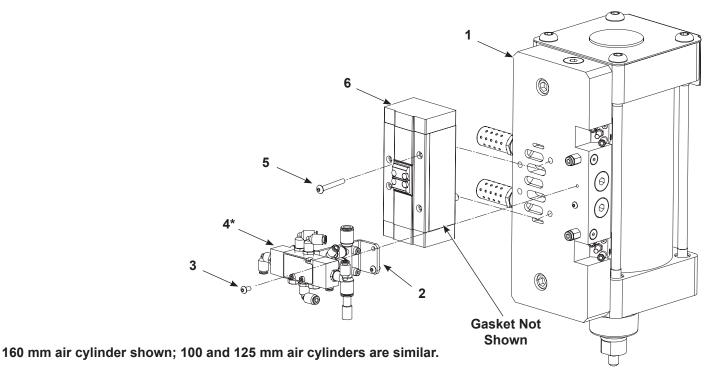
Remove/Replace Main Air Valve (100, 160, and 200 mm Air Cylinders)
